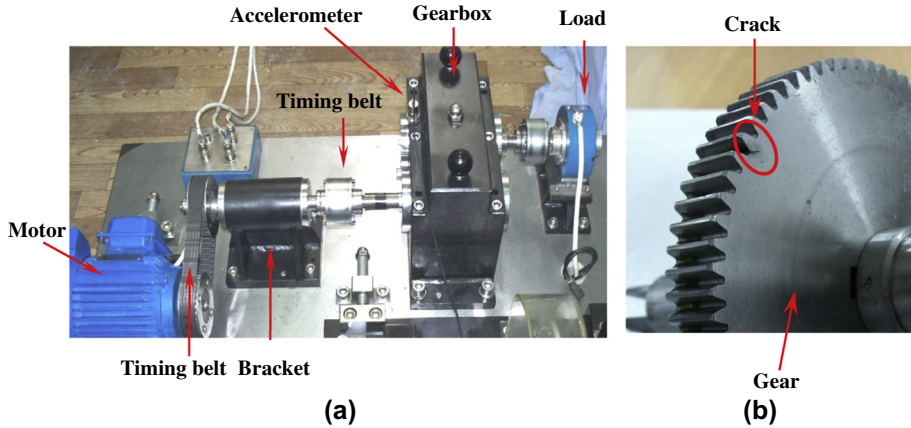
(a) The spur gear rig. (b) The gear with tooth crack.
